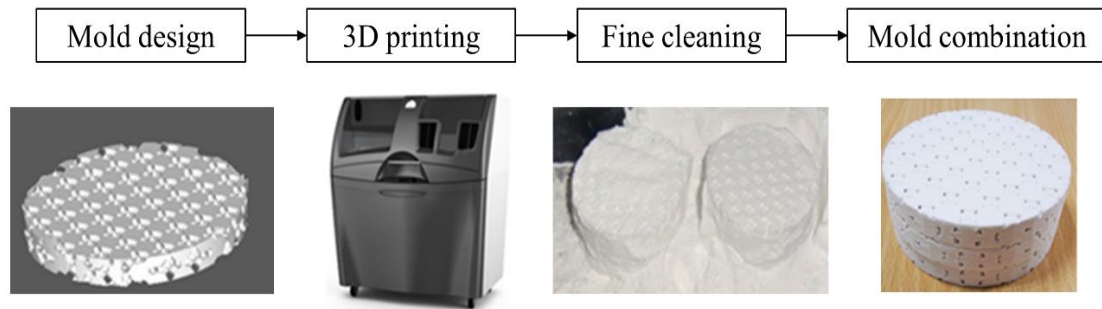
Manufacturing process of mold using 3D printing [22]
